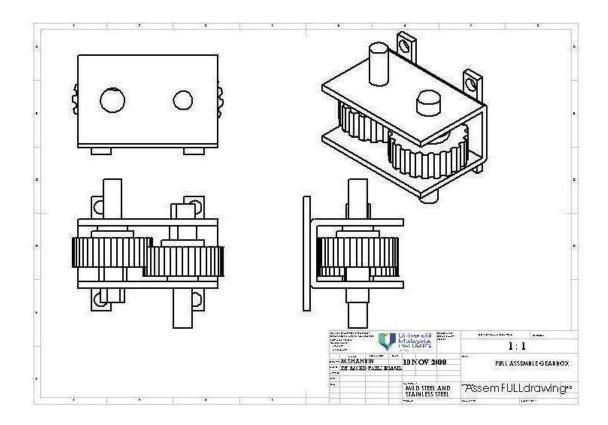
Full Assemble dimensions (APPENDIX $\,B$)
